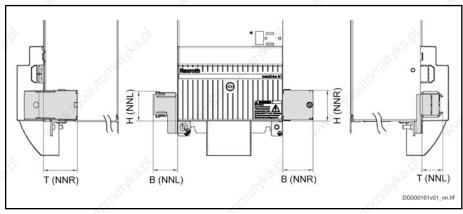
Mounting dimensions HAS05.1-004-NNR, -NNL
